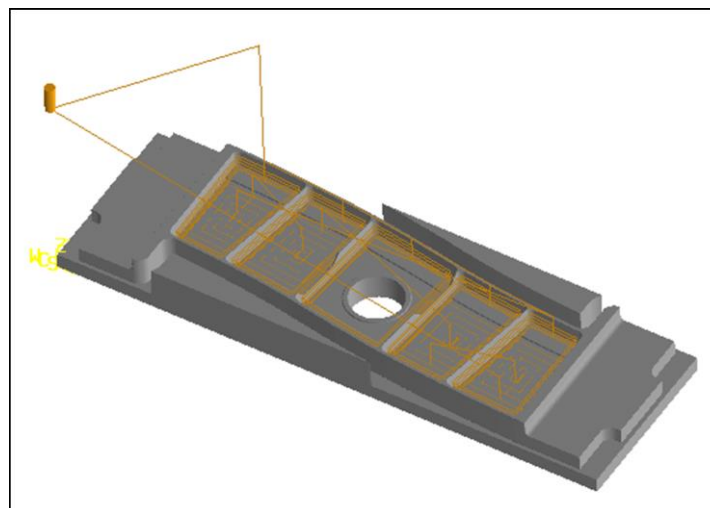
In-process cut stock after machining side one of the fatigue coupon.
